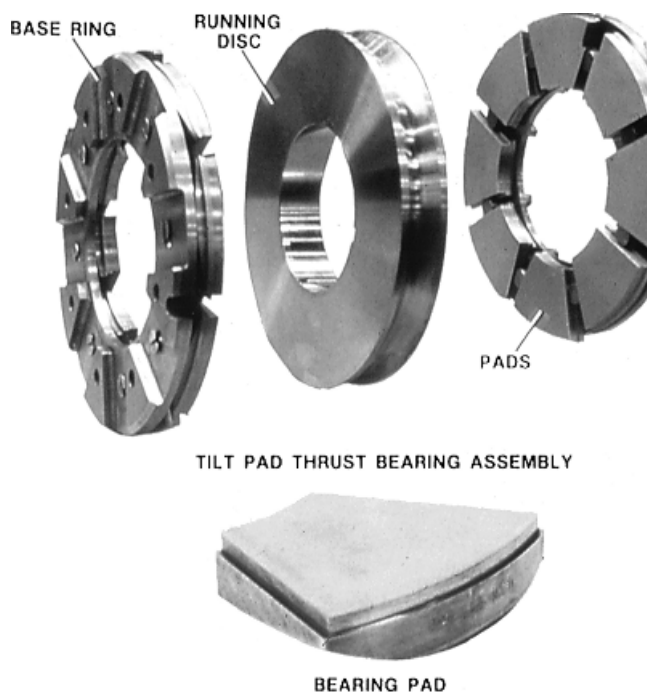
Thrust bearing assembly. (*Dresser-Rand Company, Olean, N.Y.*)
